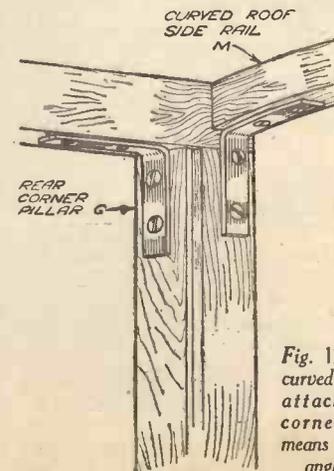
How the curved roof rail is attached to the corner pillar by means of an iron angle bracket.
